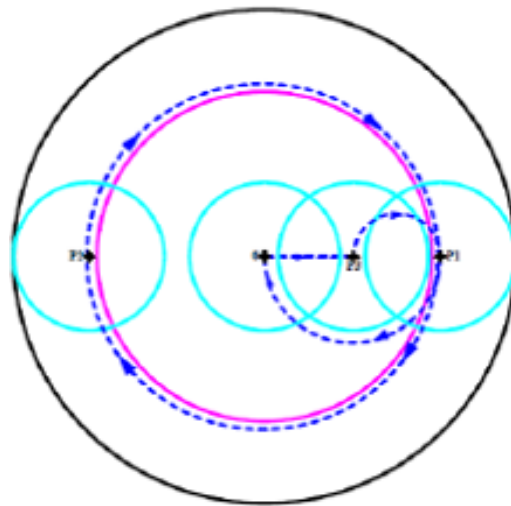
Milling Tool Path for the Third Route (First Sub Route)
